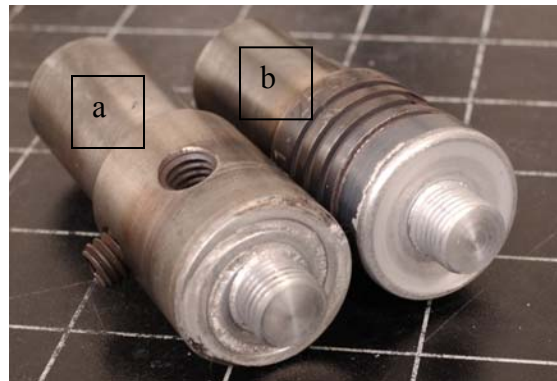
FSW tool with a scrolled shoulder (a) and a smooth shoulder (b)
